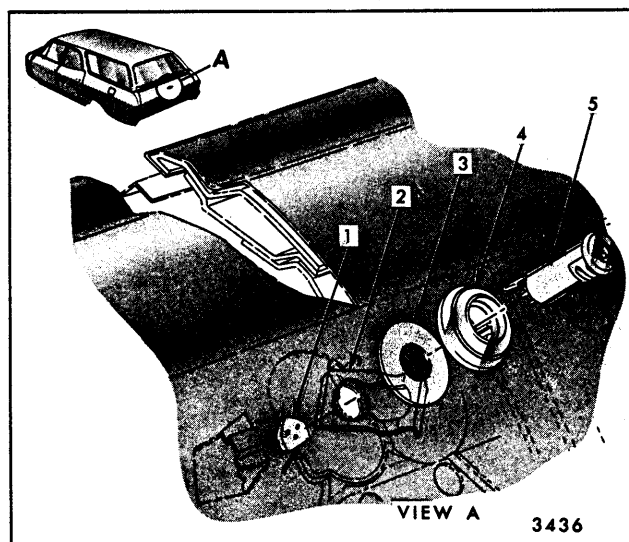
Dual Gate Electric Key Switch and Cylinder Removal - "A" Body
